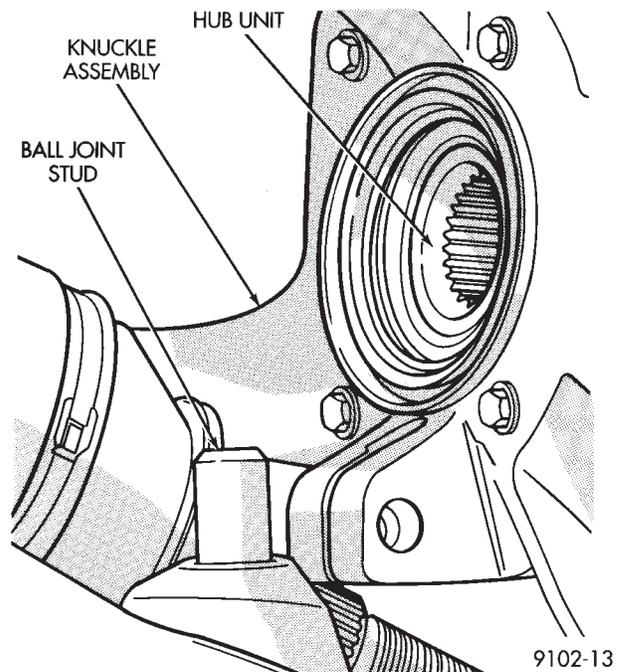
Separate Ball Joint Stud from Knuckle Assembly
